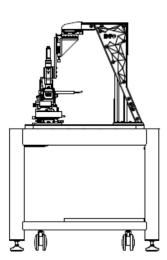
Technical drawing of the OPAL-SD-50 main system with dimensions in millimeters. Shown with one (1x) PRO-S-30 optical head, one (1x) PRO-ECO-60 optical head, and one (1x) base frame. Not shown: included industrial rackmount PC and IT kit (monitor, keyboard, mouse). Also not shown: chiller and thermal chuck controller included with -TH1 option, as well as optical and electrical test equipment. Configuration non-final.
